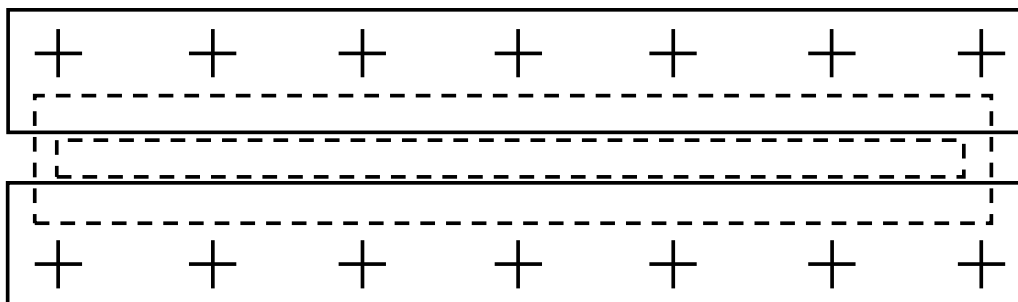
Schematic of clamping arrangement used during additive manufacturing
